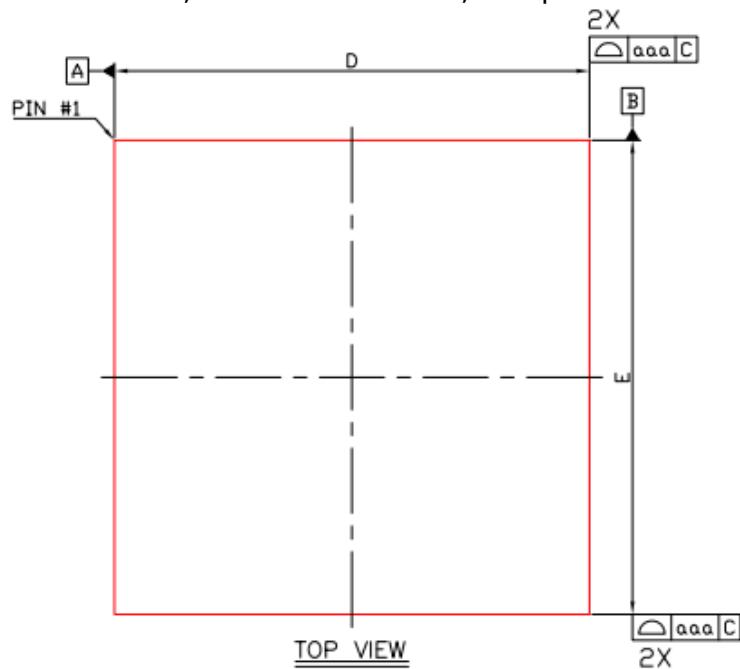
RK618 TFBGA(HF) Package Top View
